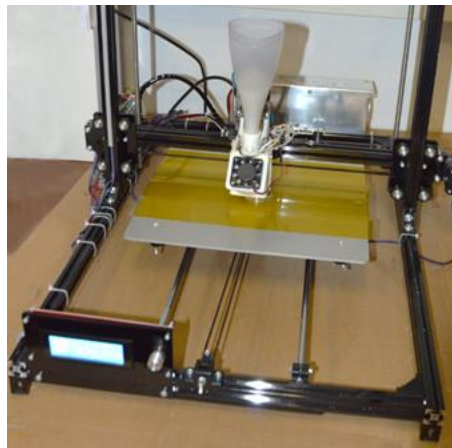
Modified 3D printer with a Mahor extruder for FGF technology.
